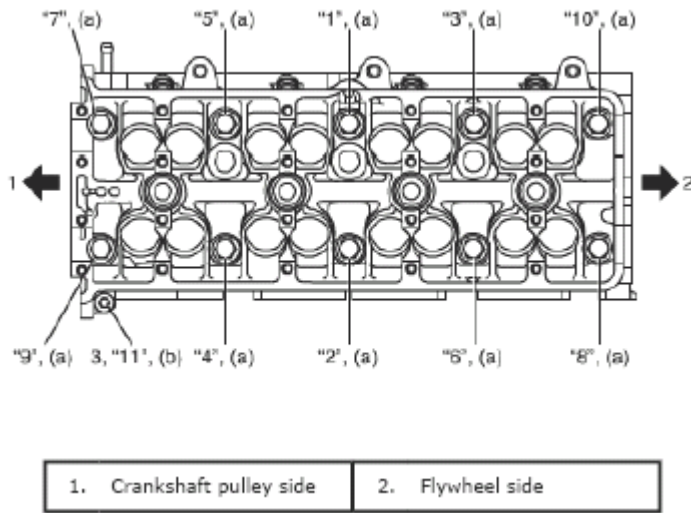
Identifying Tightening Sequence Of Cylinder Head Bolt
